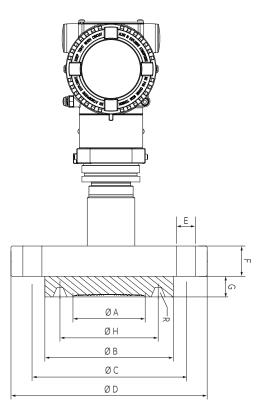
266DRH with barrel housing and direct mount seal S26RR flanged Ring Joint flush diaphragm (For dimensions of S26 seals refer to the S26 datasheet)
